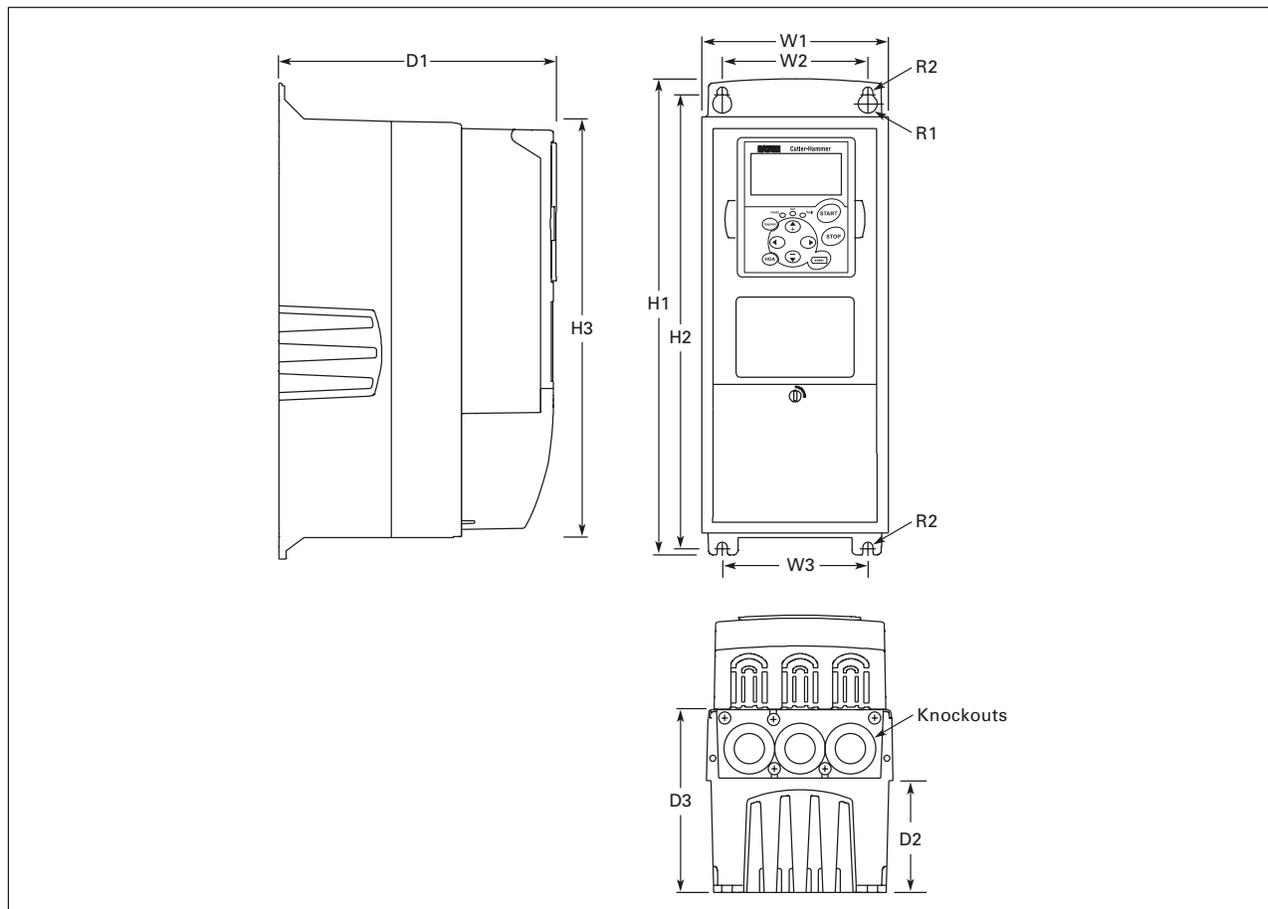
NEMA Type 1 and ~~NEMA Type 12~~ SPX9000 Drive Dimensions, ~~FR4, FR5~~ and FR6
